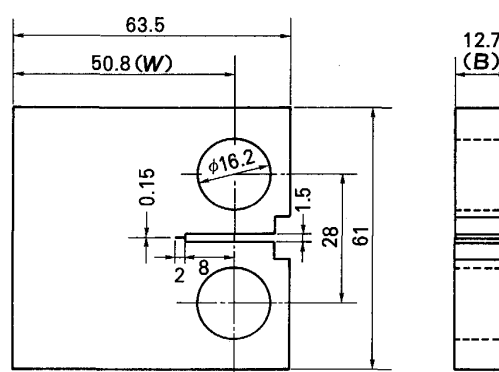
Compact type specimen used to measure fatigue crack growth rate in 660 MPa steel (mm).
